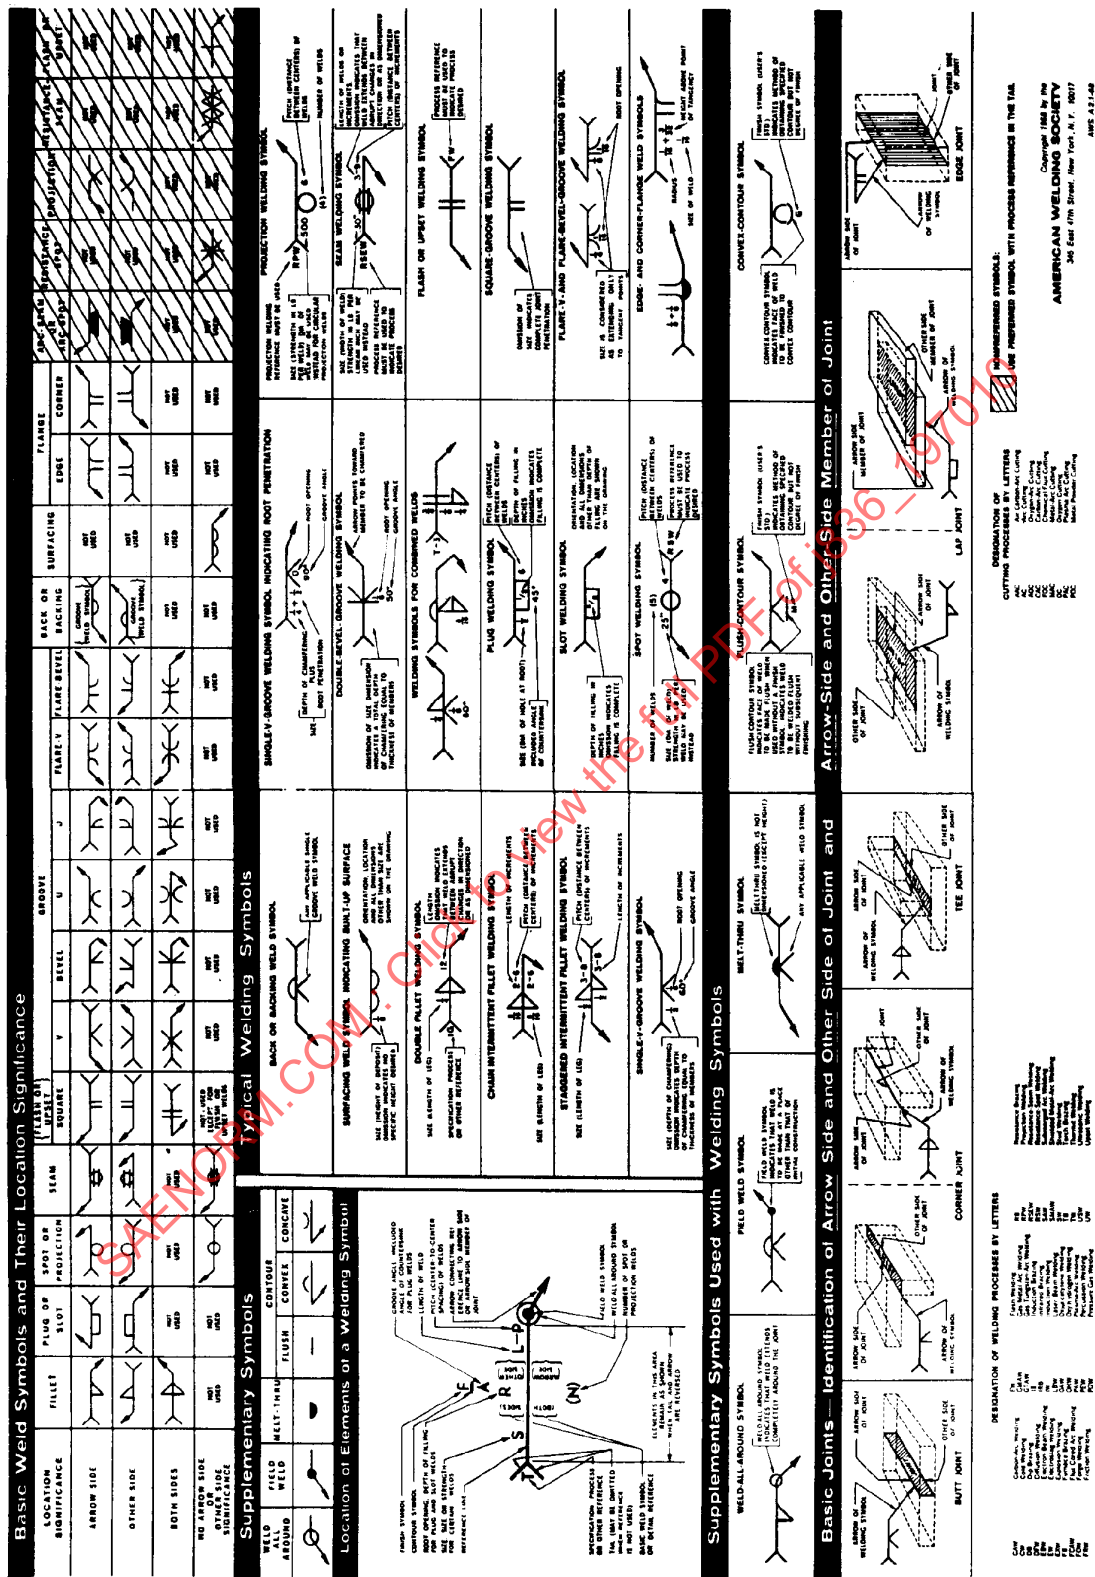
AMERICAN WELDING SOCIETY STANDARD WELDING SYMBOLS
